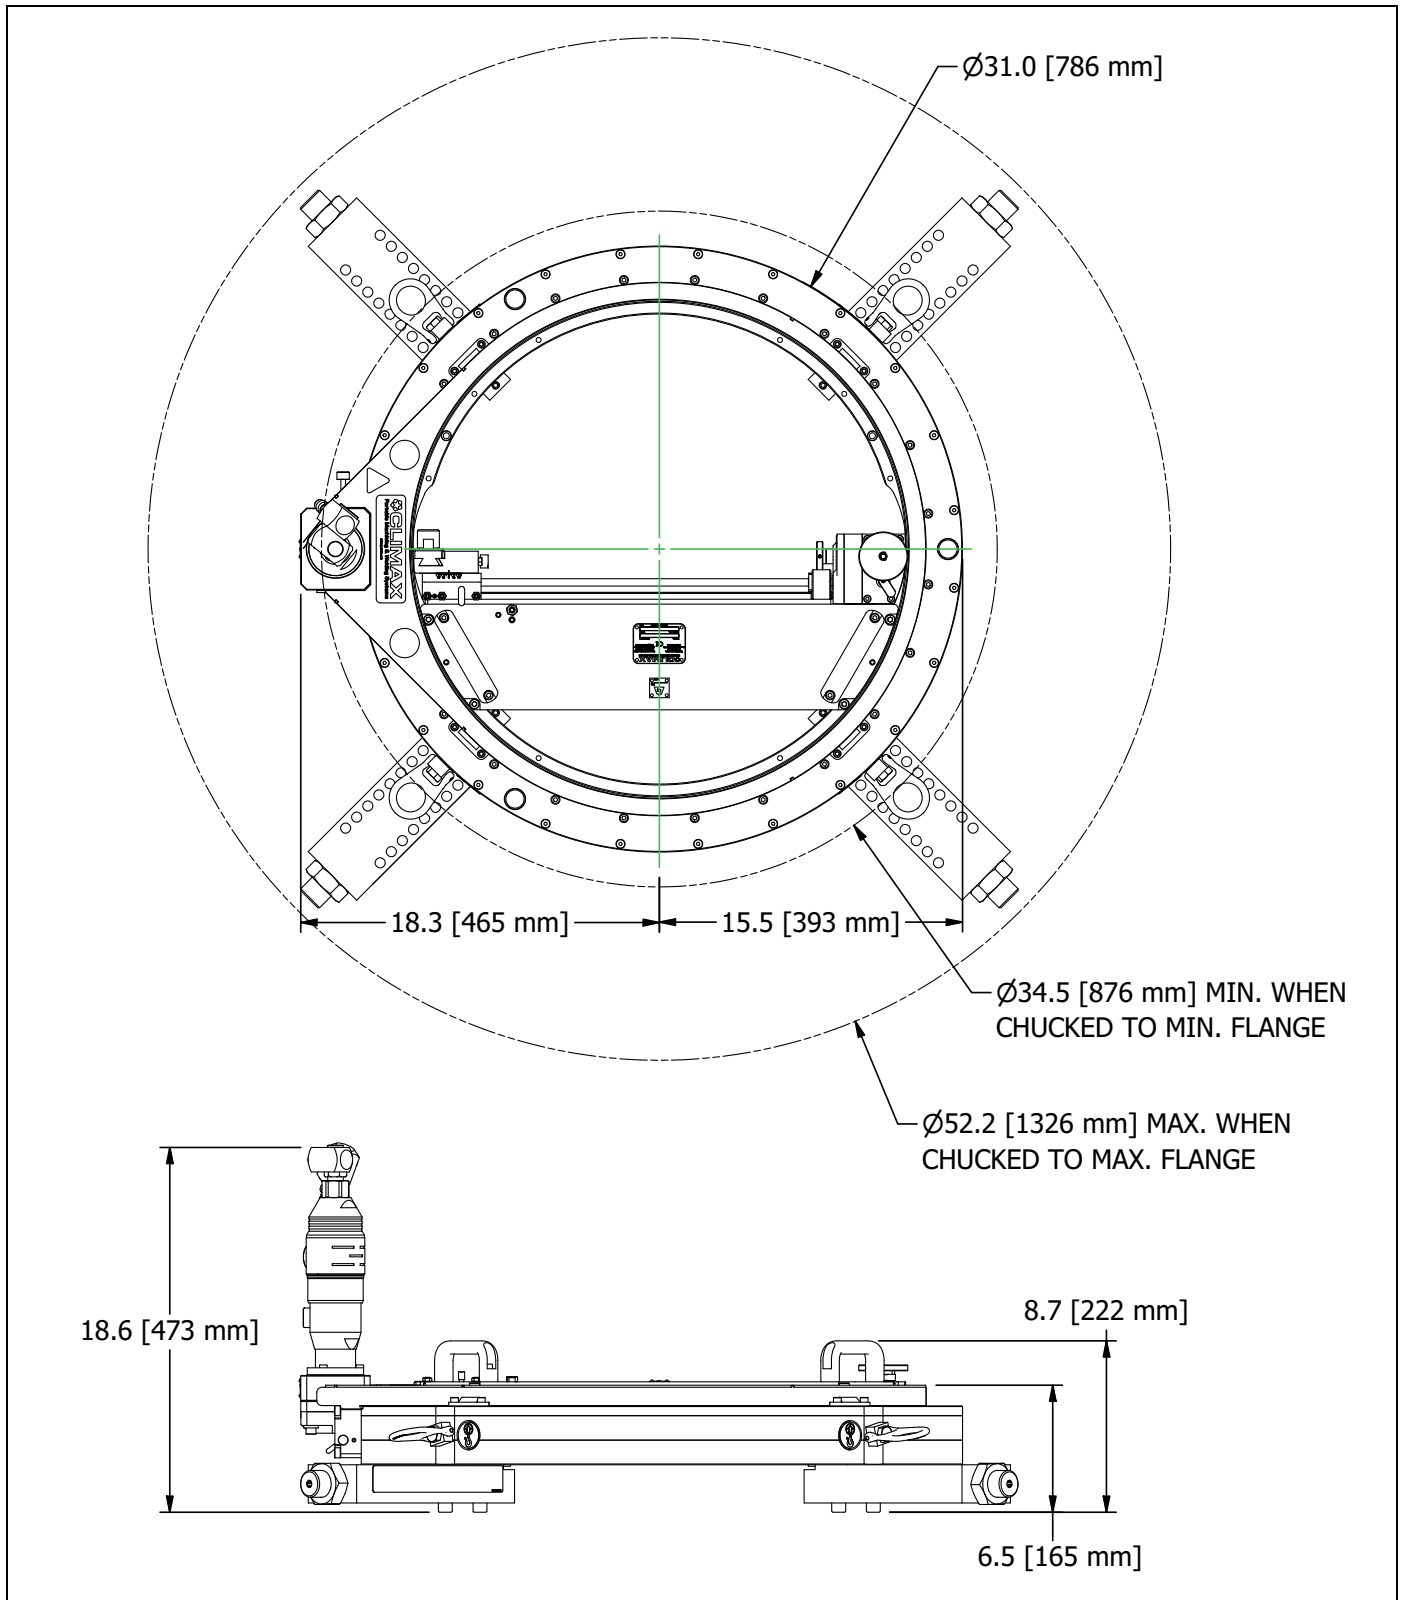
FF2400 MACHINE DIMENSIONS
